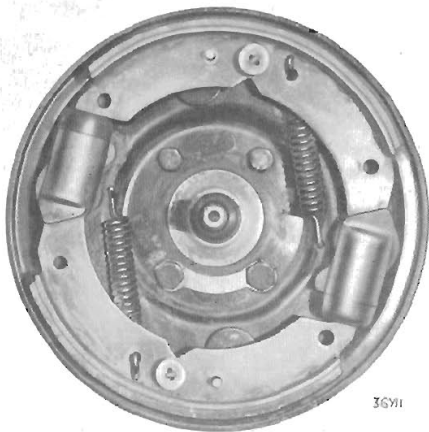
Arrangement of brake shoes and pull-off springs (front right-hand side)
